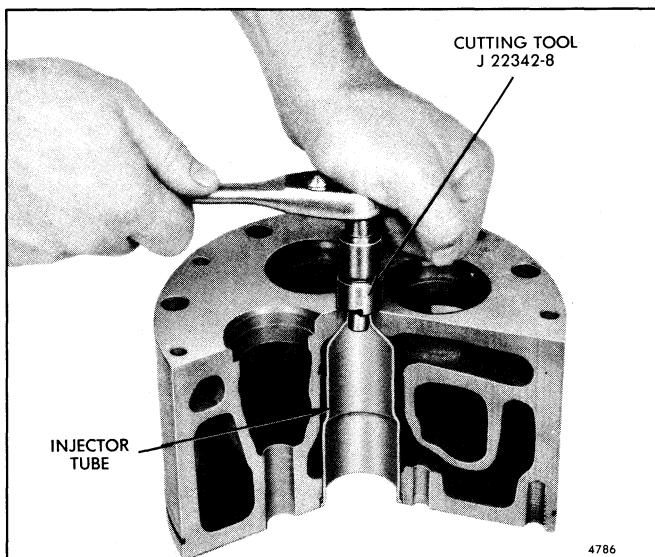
Reaming Injector Tube for Injector Body Nut and Spray Tip with Tool J 22342-5
